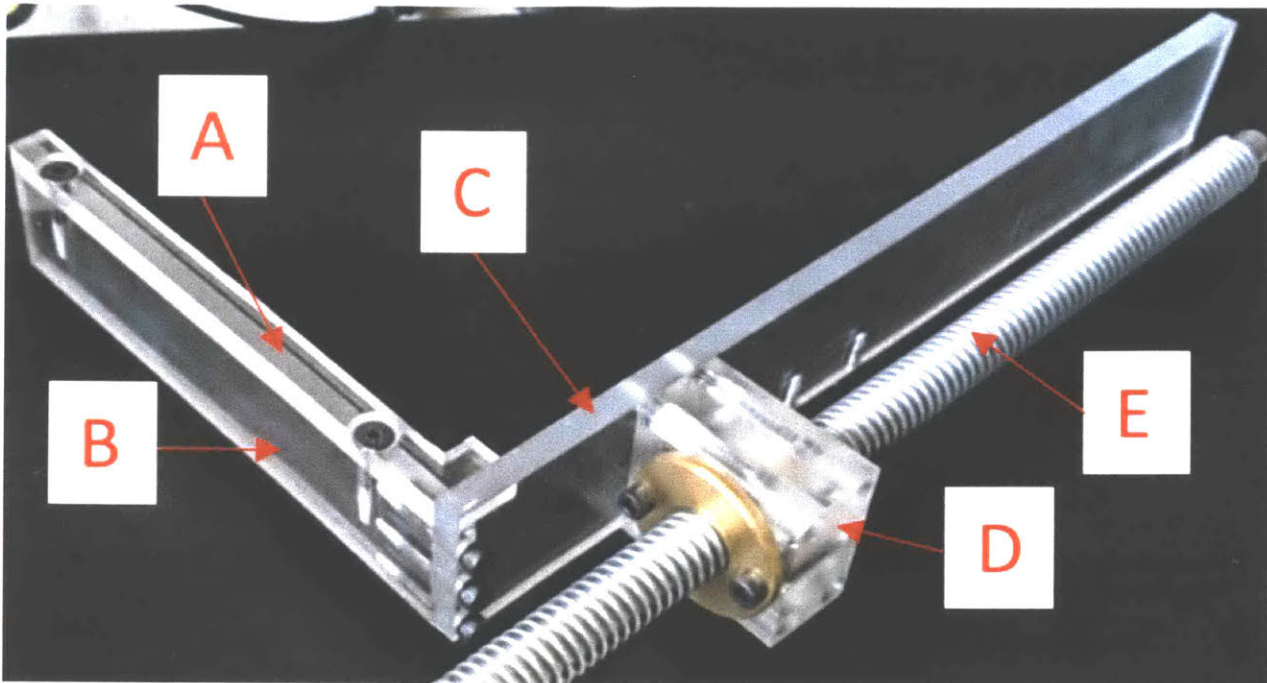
Isometric view of tray slider mechanism. A) First row biasing lip. B) Back panel. C) Side panel. D) Lead screw bearing block. E) Lead screw.
